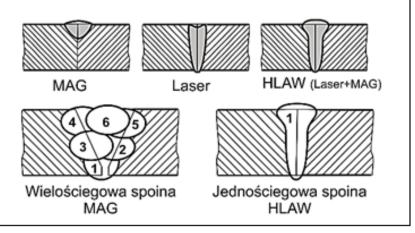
Different shapes and geometry of welds made using the MAG, laser beam and hybrid laser + MAG welding processes [1]
